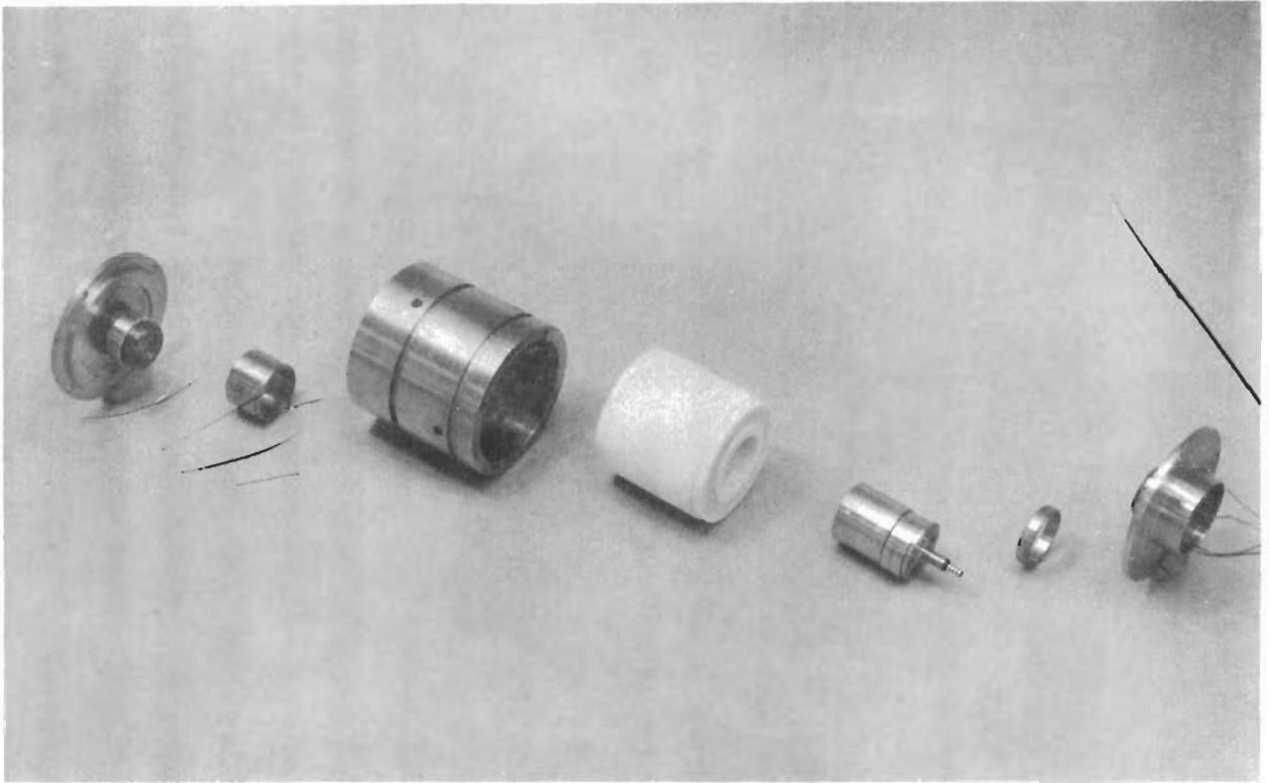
Hydrodynamic Gas Bearing Initial Test Bed Parts
